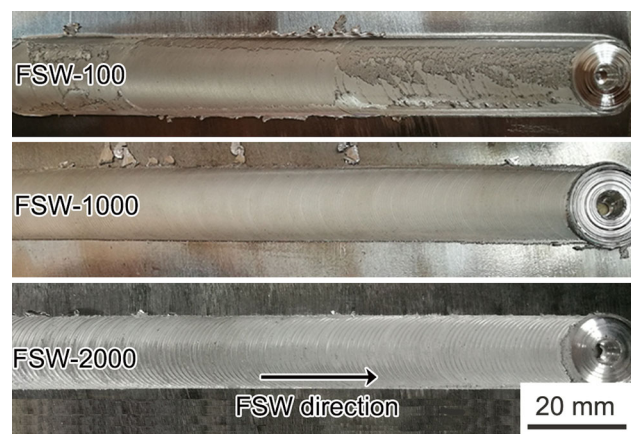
Surface morphologies of FSW joints at different welding speeds
